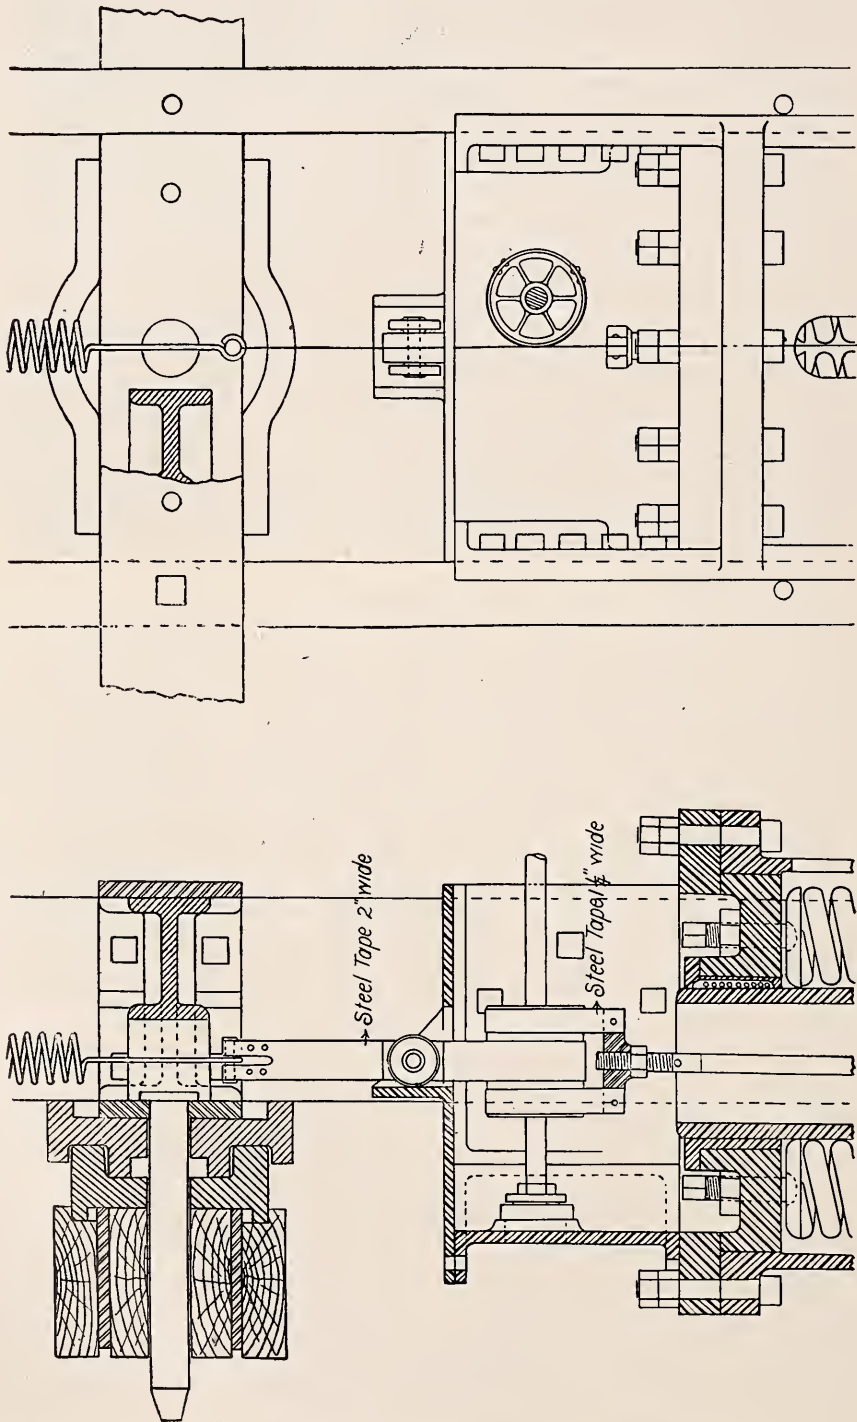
ENLARGED DETAIL, TRANSMISSION OF DRAWBAR PULL
